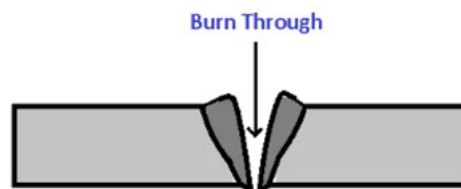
Representing the Burn Through in welding process [The Engineers Post].
